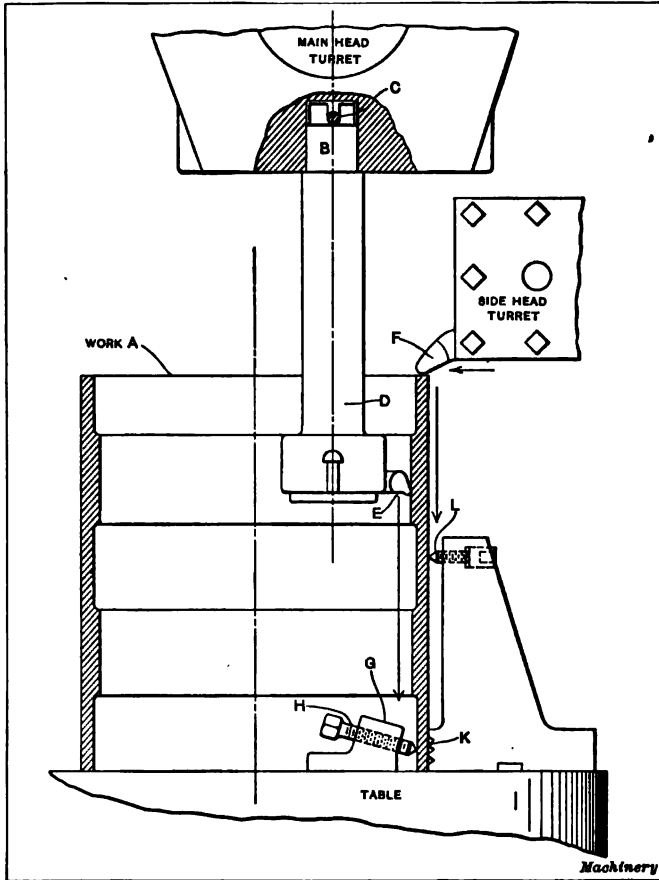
Boring, Facing and Turning a Thin Casting in a Vertical Turret Lathe
